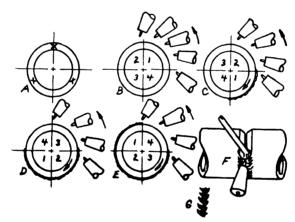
The rolling method of welding pipe welding: A. Three tacks 120° apart, B. First part weld, C. Pipe rolled and second quarter welded, D. Pipe rolled and third quarter welded, E. Pipe rolled and fourth quarter welded, F. Position of torch and filler rod, G. Weaving motion used
